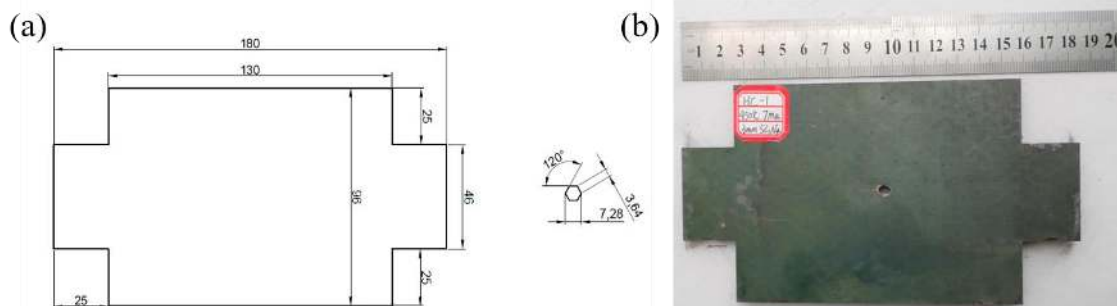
Honeycomb sandwich specimens (unit: mm) (a) Dimension (b) Photo after impact
